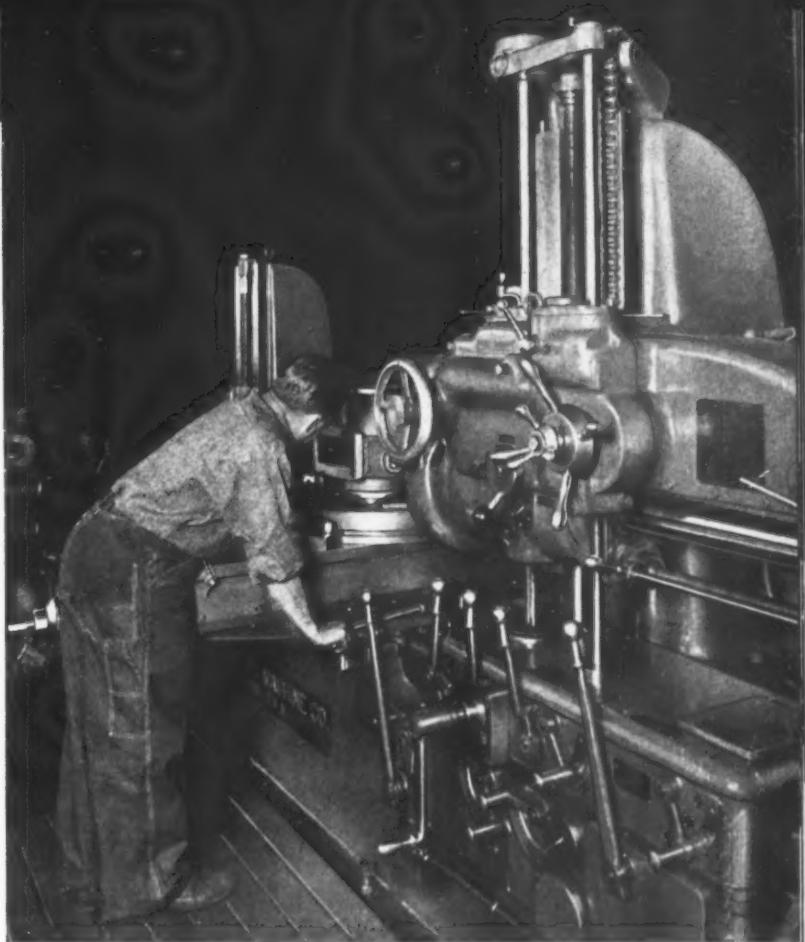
Employing a Horizontal Boring Mill for the Performance of Boring and Threading Operations on a Large Valve Casting
